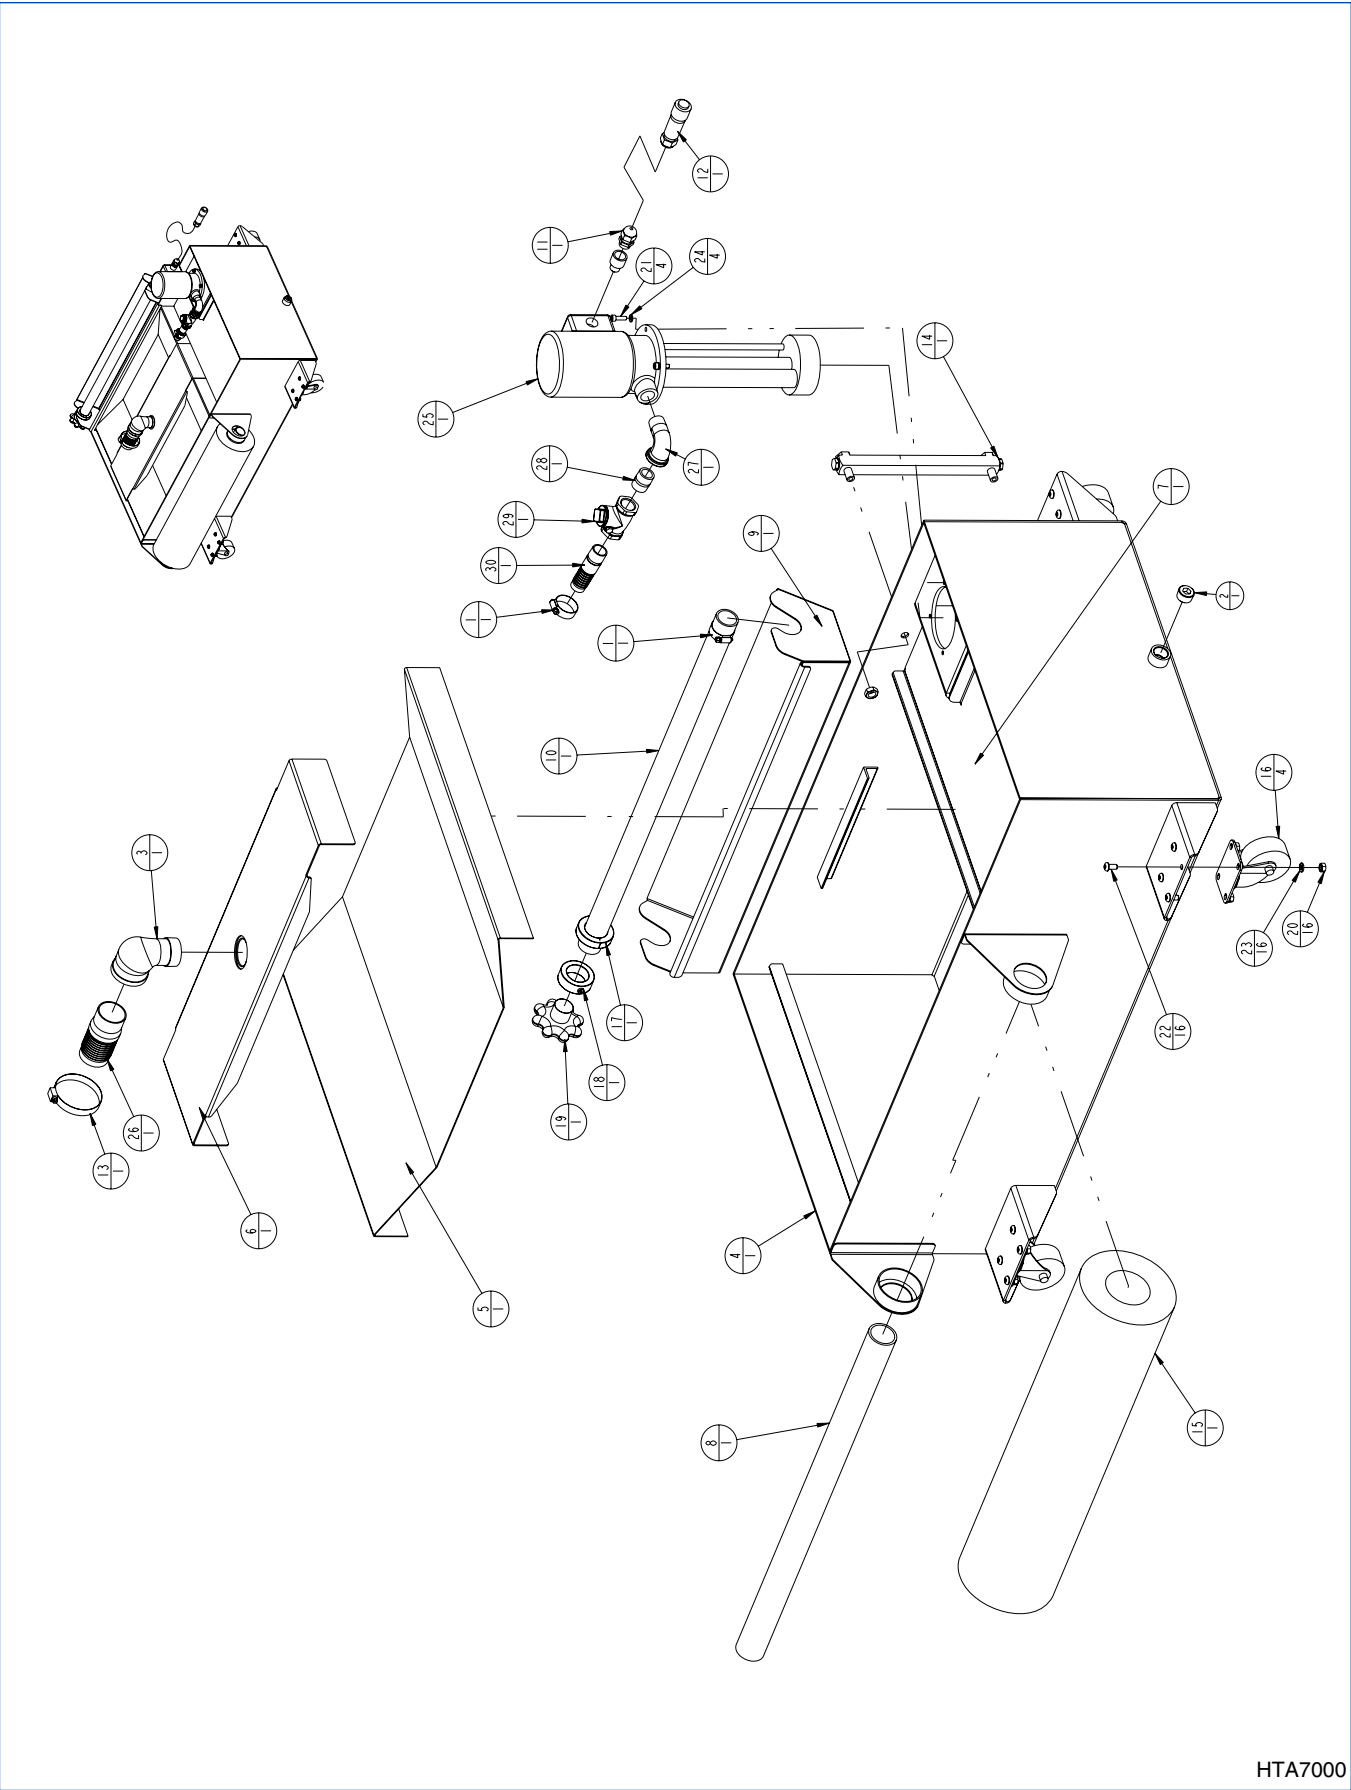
P – 4 METER EXTRUSION GUARD ASSEMBLY - CE
